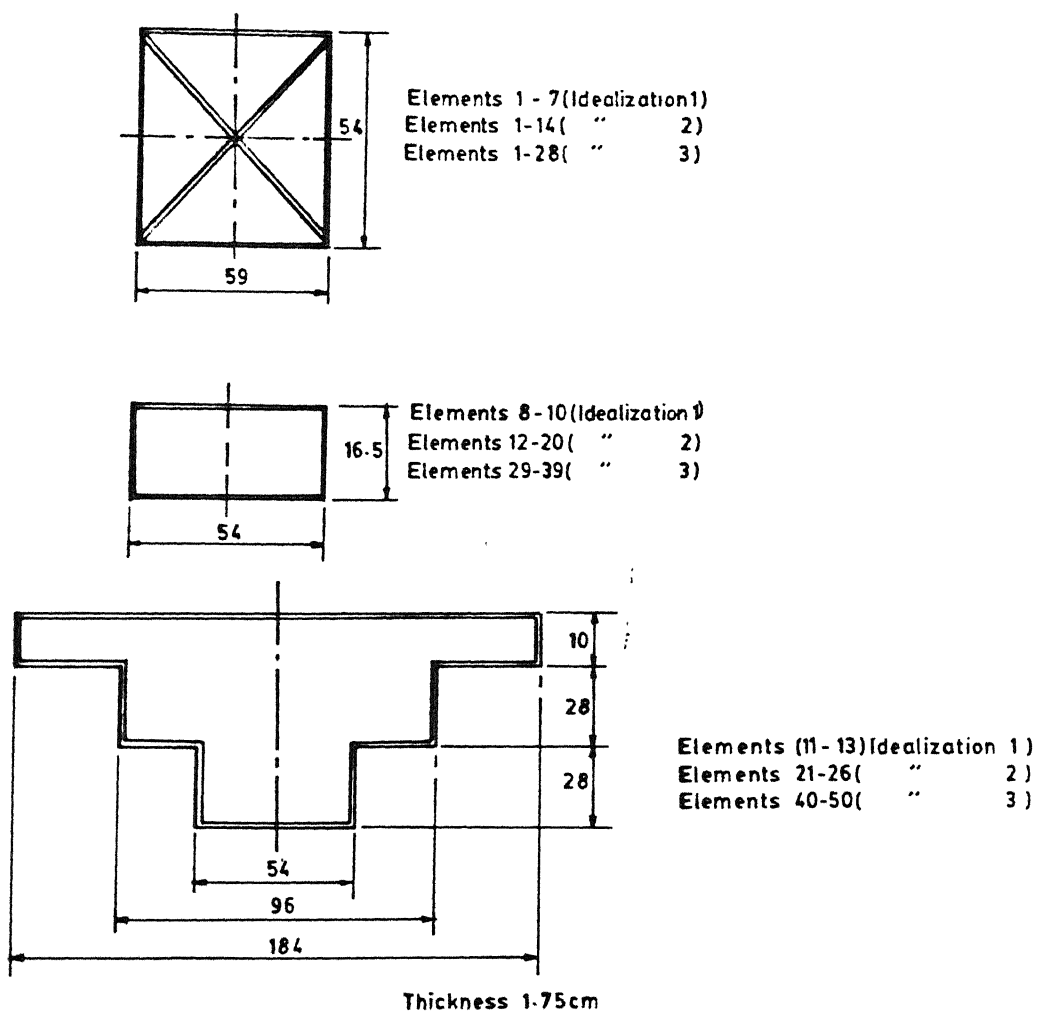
CROSS SECTION OF MILLING MACHINE STRUCTURE
